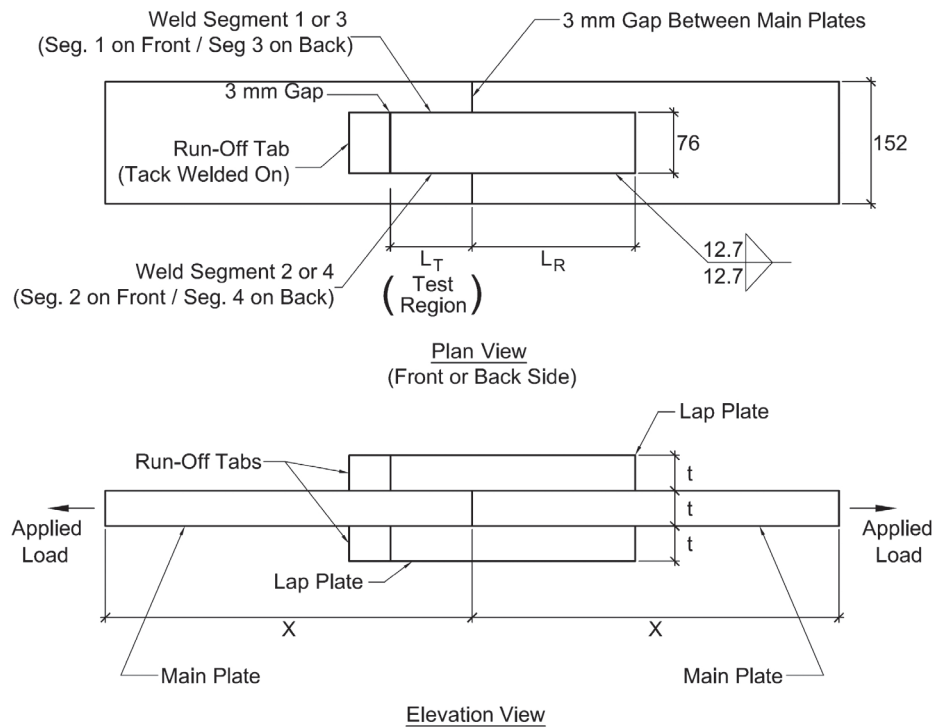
Complementary test longitudinal fillet weld (L) specimen.
